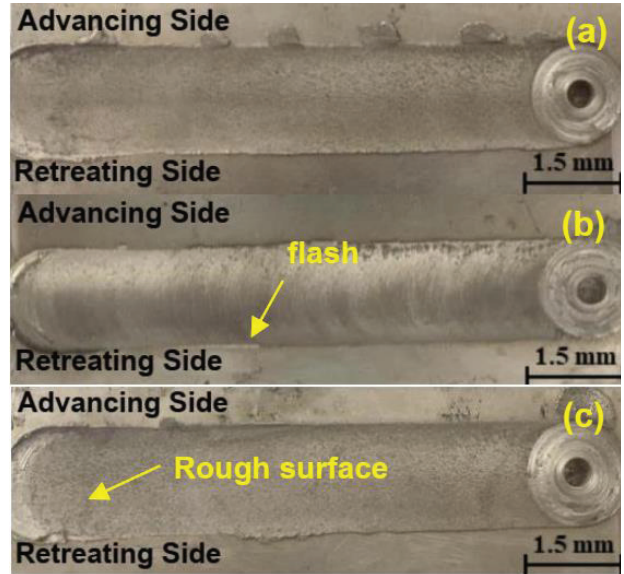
Characteristics of welding from top view surface using a square pin at rotation speed 2000 rpm and welding speed: (a) 80, (b) 112 and (c) 160 mm/min
